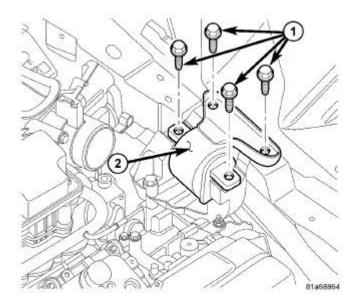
Engine Mount Insulator and Vertical Bolts Courtesy of CHRYSLER LLC
